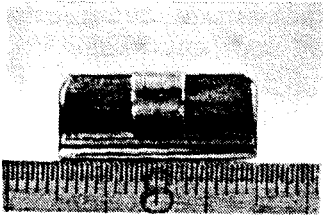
Pitted State after Gear Pitting Fatigue Test
